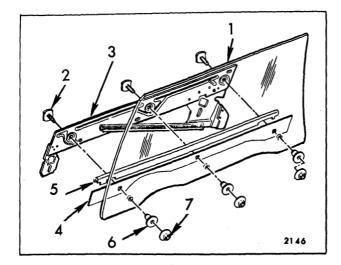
Front Door Window Assembly - All "37-39-47-57 and 67" and "C-69" Styles
